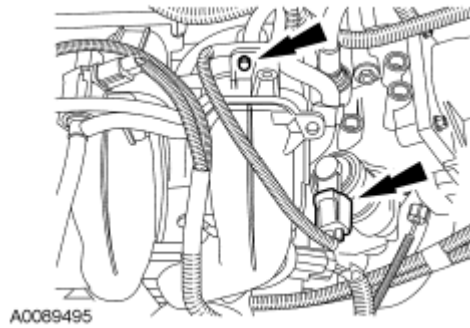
Locating Idle Air Control Valve Electrical Connector And Wiring Harness Pin-Type Retainer
